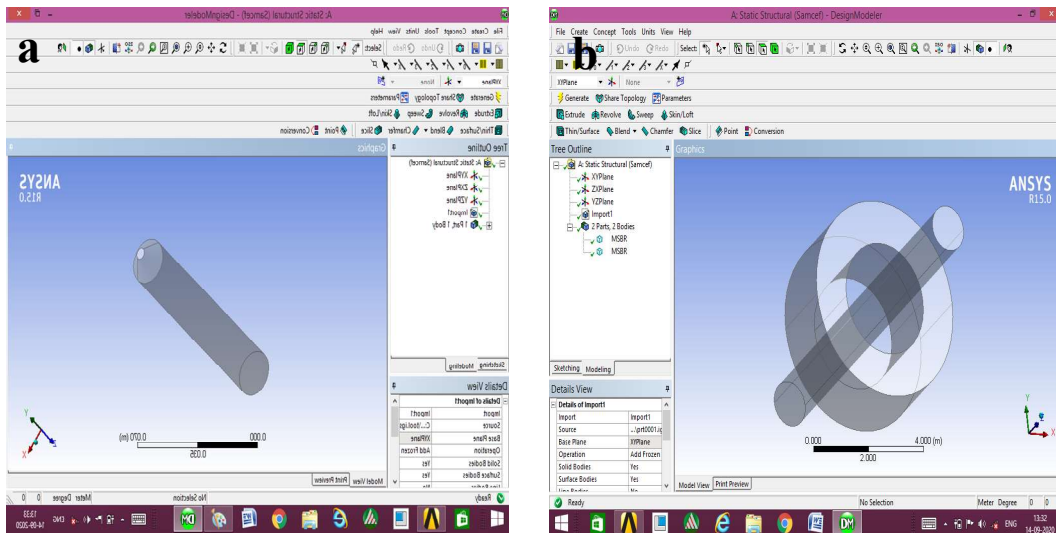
Steps followed in design of finishing tool through ANSYS R 15.0
